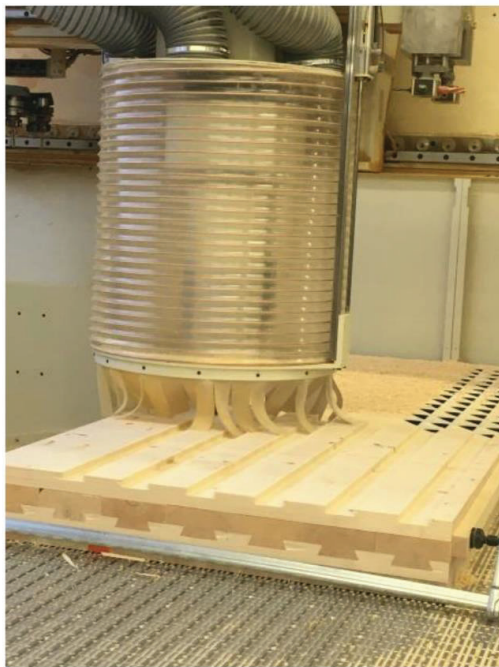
The manufacturing of DMWBEs with a 5-axis CNC machine.
